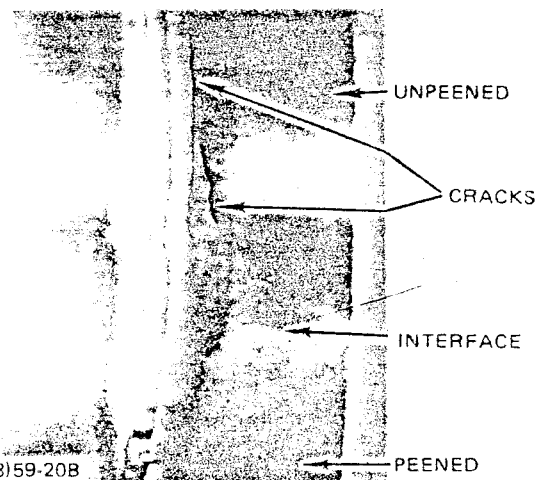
Type 347 stainless steel pipe weld showing stress corrosion cracks in unpeened surface after 22 h in $MgCl_2$ test. (No cracks developed in the peened surface.)
